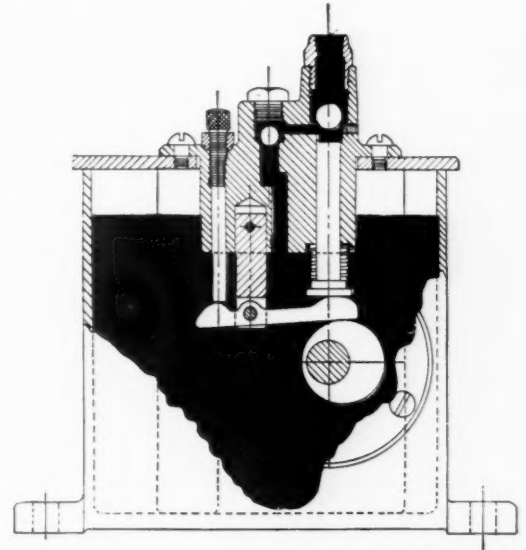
A Bosch Type MRD oiler showing: 1. Lubricator body; 2. Screw Cap; 3. Lubricator Base; 4. Drive Shaft; 5. Oil Outlets; 6. Suction Inlet; 7. Worm; 8. Pump Shaft; 9. Pumping Plunger; 10. Pumping Plunger Head; 11. Radial Bore Holes; 12. Oil Passage; 13. Outlet Nipple.
